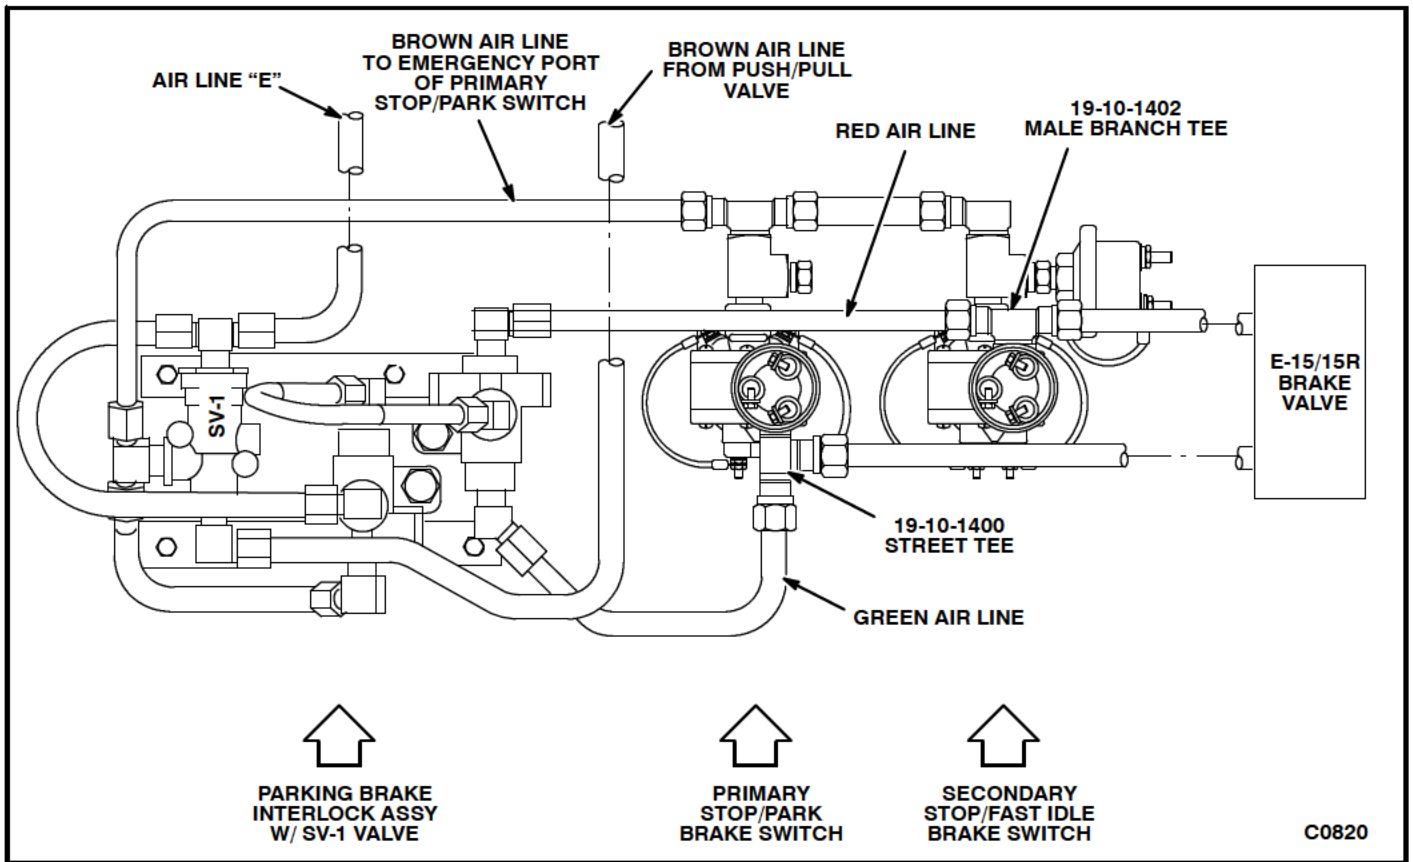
Brake System With E-15/ E-15R Brake Valve and Parking Brake Interlock.
